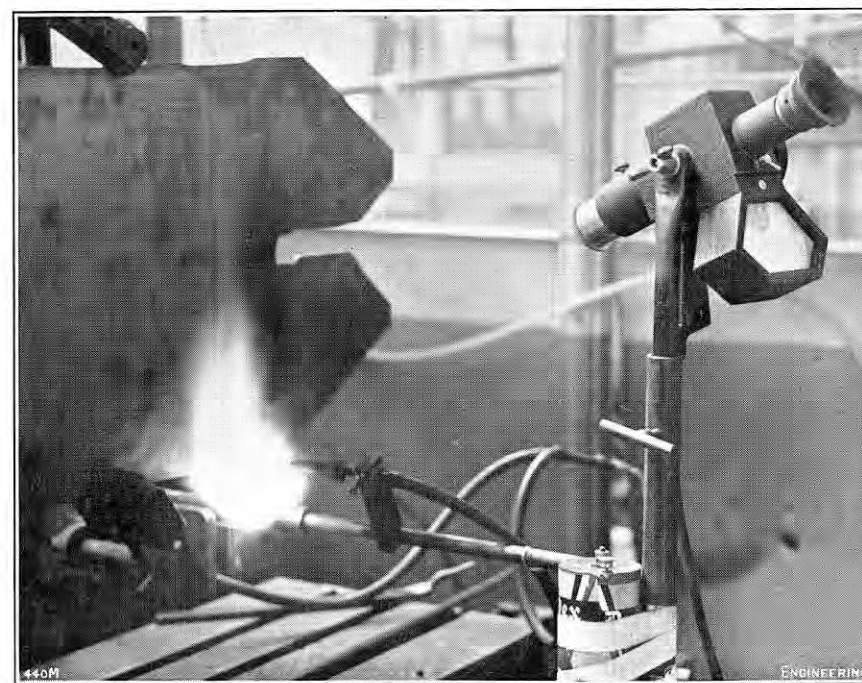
BRAZING STIFFENING FILLET TO LEADING EDGE OF SHELL.
